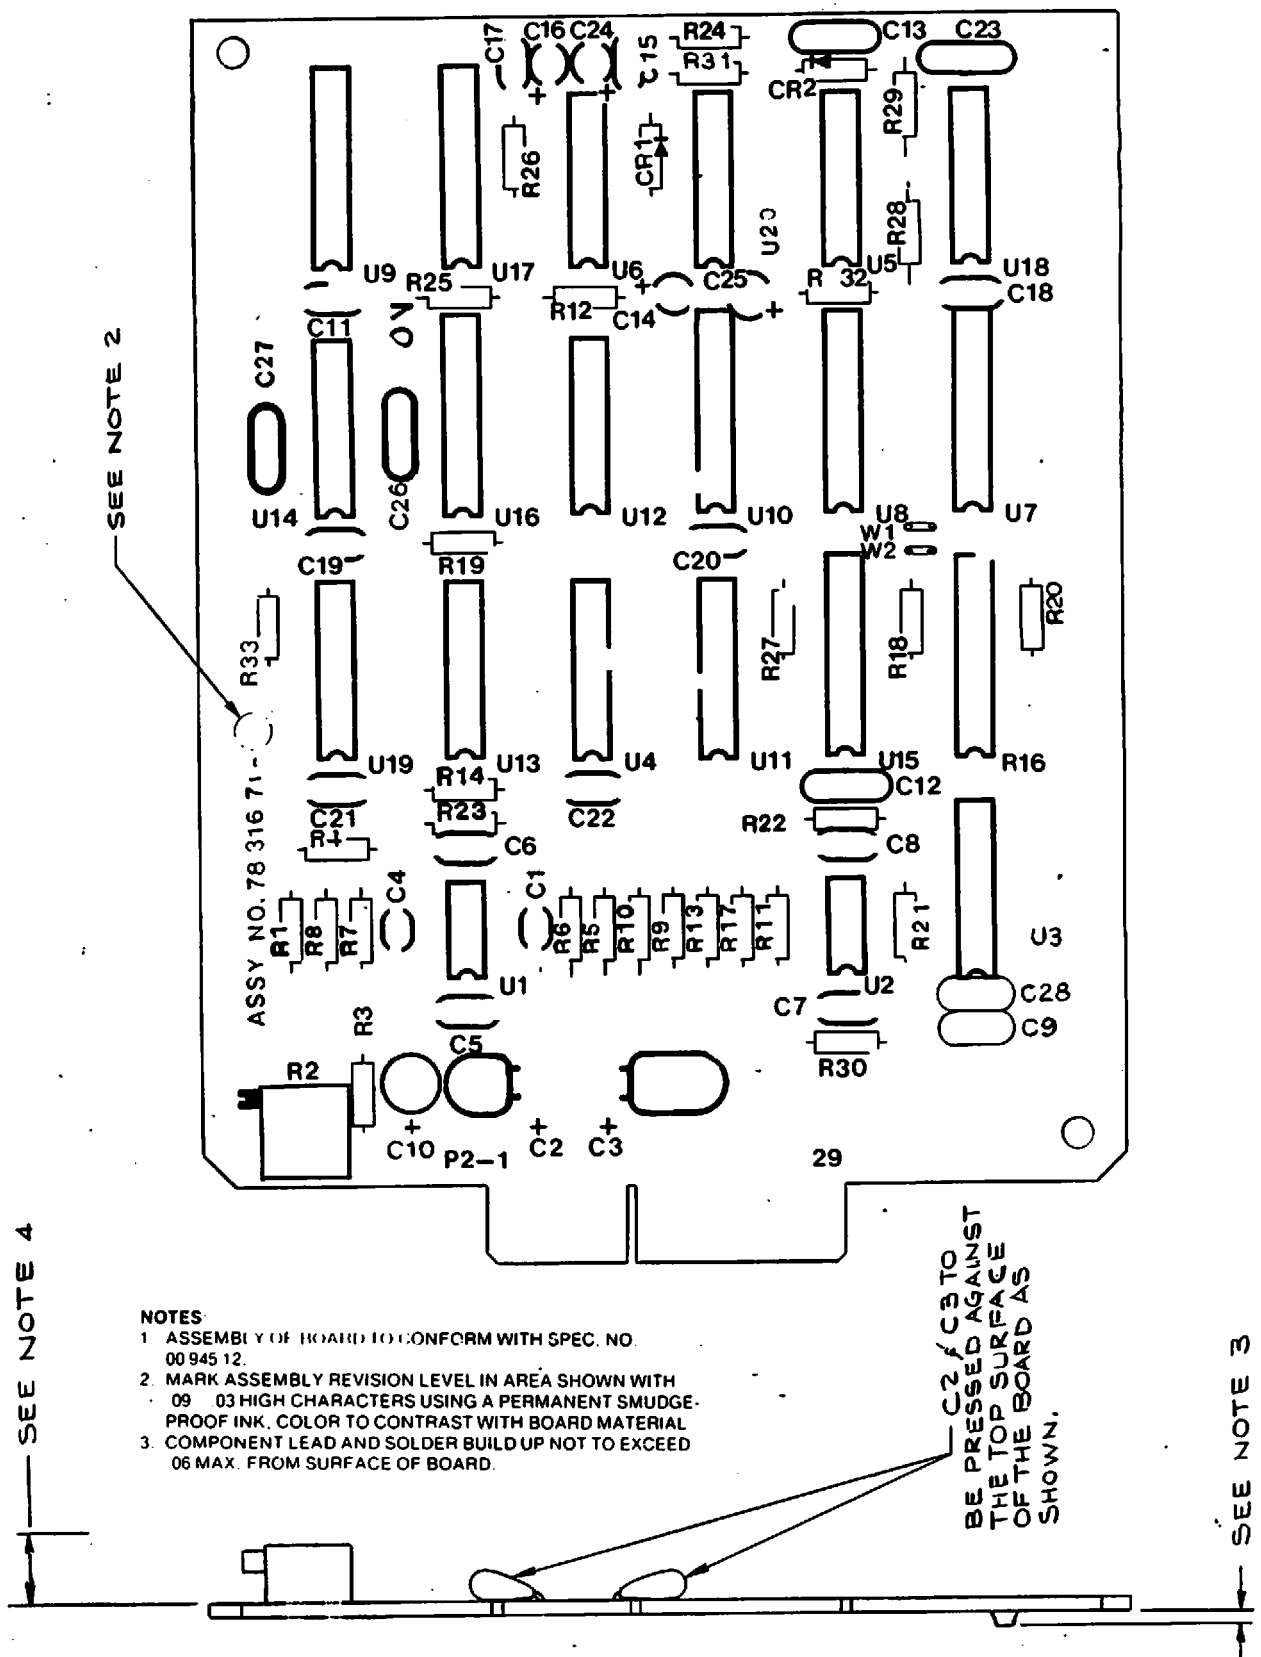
CONTROLLER MEASUREMENT/DIGITAL BOARD PCB2 PARTS LOCATION DIAGRAM
